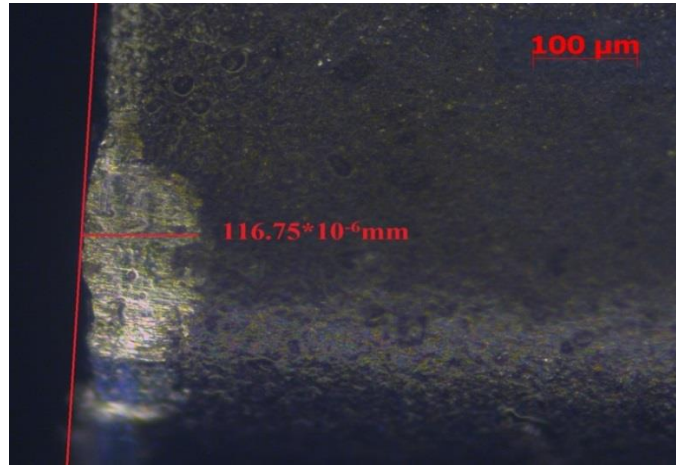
(c) Flank wear for PVD coated tool for Spindle Speed 400 RPM, depth of cut 0.8 mm, feed rate 0.16 mm/rev
